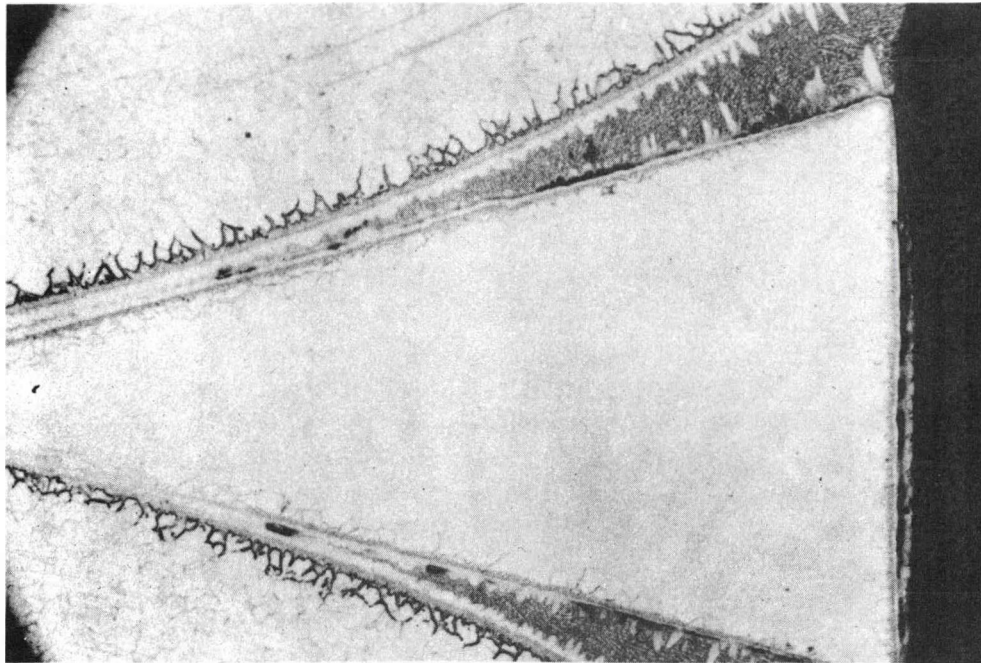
Typical Brazed Joint Using A Triangular Filler Strip Between Adjacent Tubes (30X Magnification)
